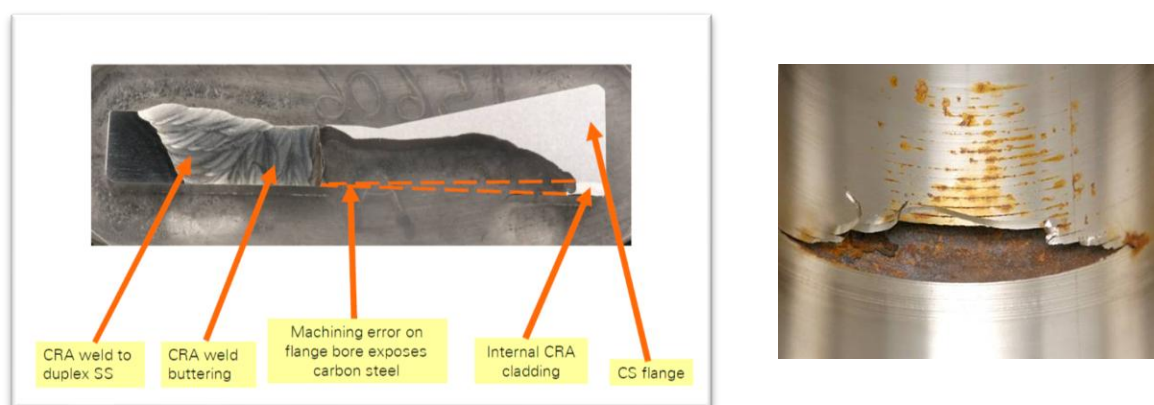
Corrosion of a weld overlay clad flange resulting from poor weld preparation
